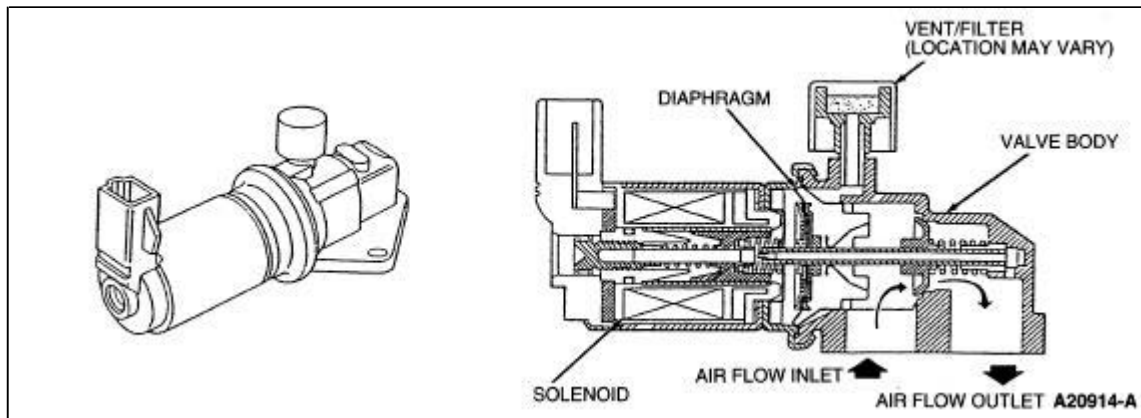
Hitachi Idle Air Control (IAC) Valve Assembly with Vent/Filter
